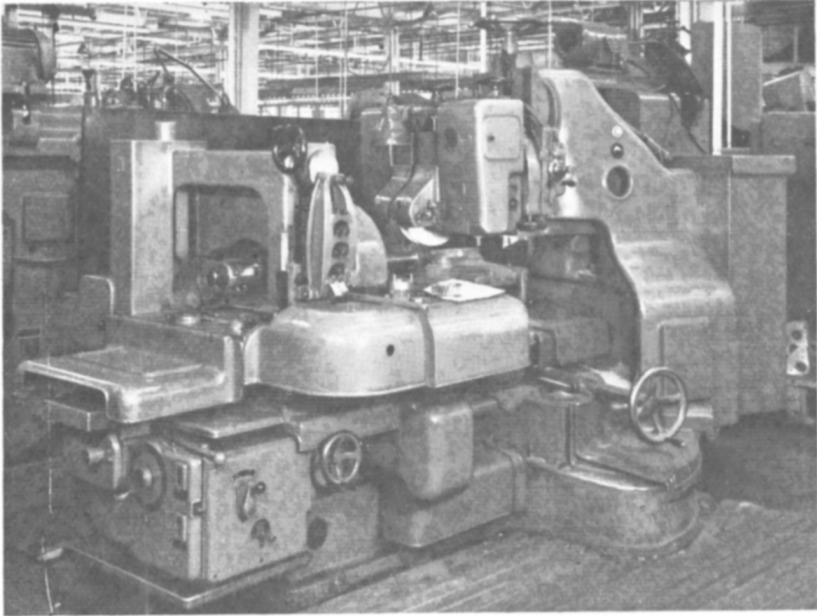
MAAG Helical Gear Tooth Grinding Machine (Type H S S 60)
